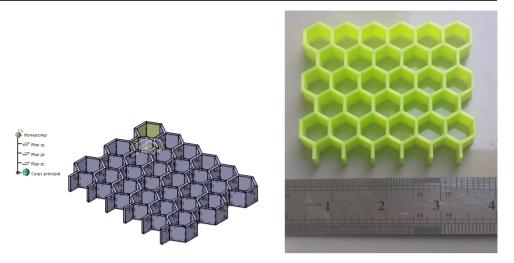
(a) Actual model (b) The dimensions of specimen.
